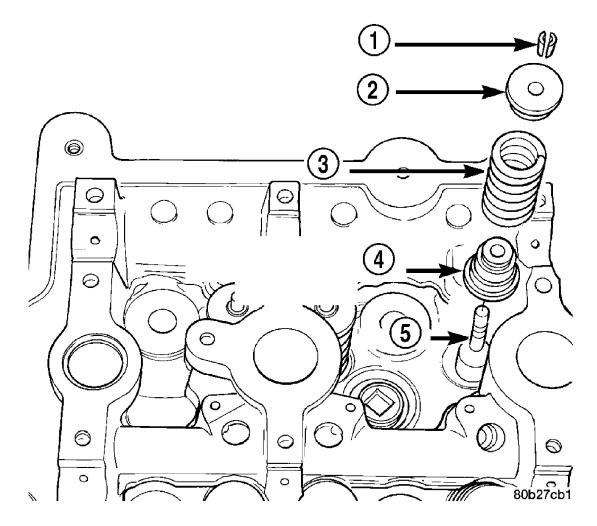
Identifying Valve Seal & Spring Seat Assembly Courtesy of CHRYSLER LLC
